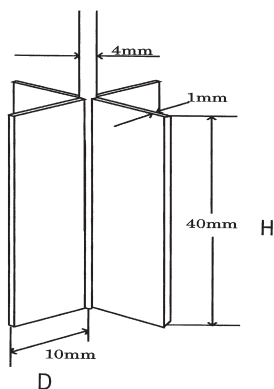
Schematic illustration of vane consists of four blades welded perpendicular to each other to the central shaft.
